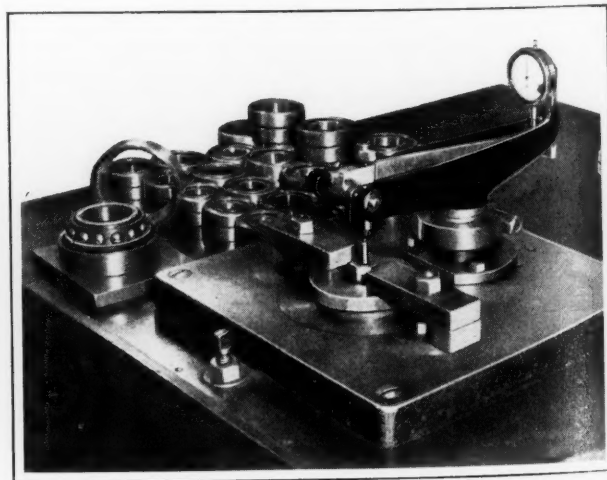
Fixture Employed for Checking Assembled Bearings for End Play
